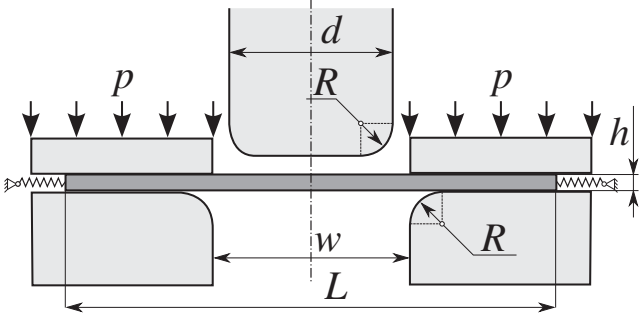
Geometrical setting of the deep cup drawing problem: rounded cylindrical die and metal sheet fixed within the tool
